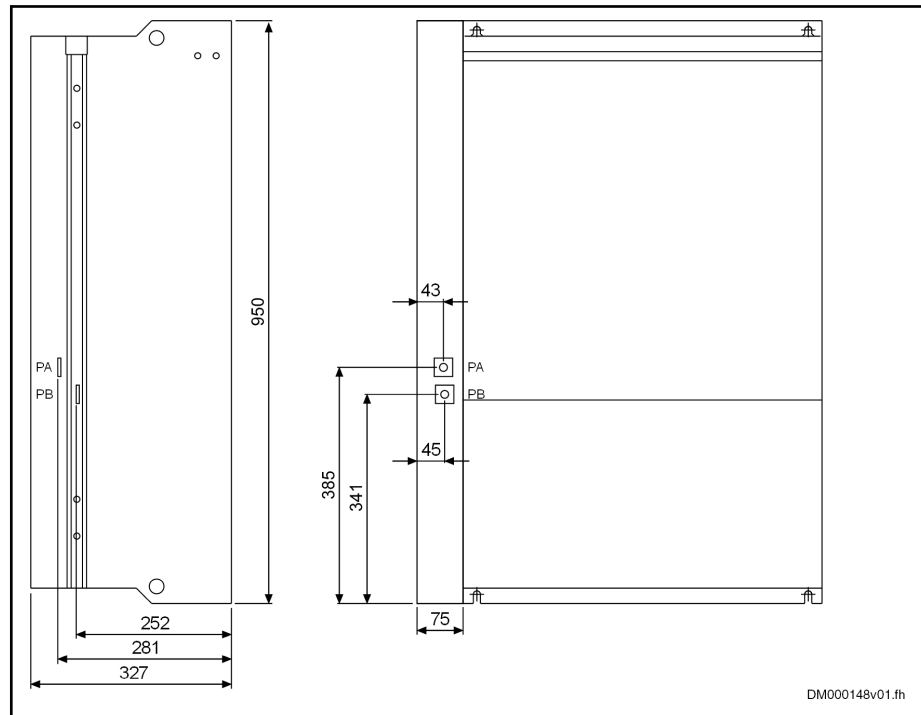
Dimensions Braking Unit HLT01.1A -200K
